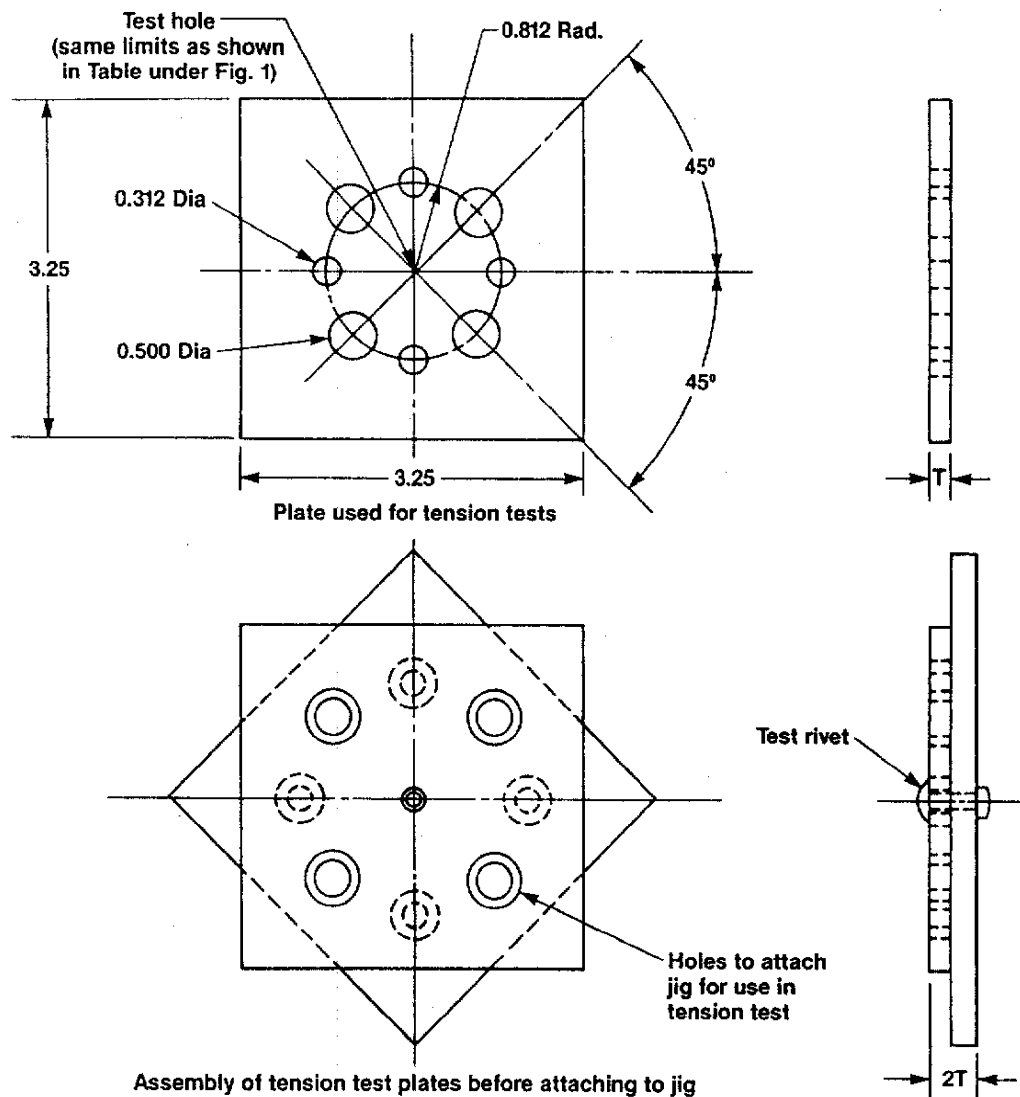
TEST FIXTURE FOR TENSILE TESTING BLIND RIVETS
